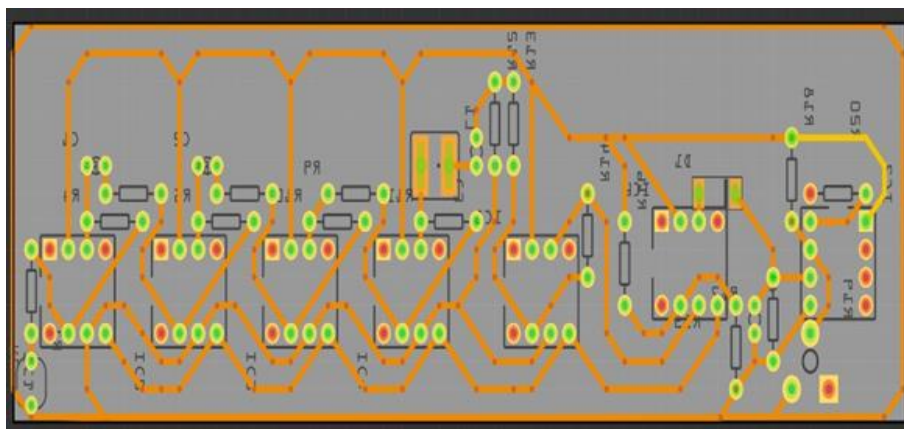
The designed circuit of the receiver part of MCC as PCB type
